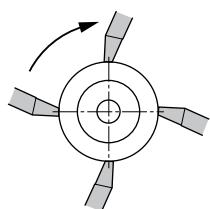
Checking the axial alignment with a calliper gauge – circumferential check
